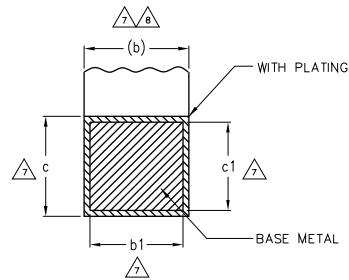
PowerSO-36 section A-A and B-B package outline
